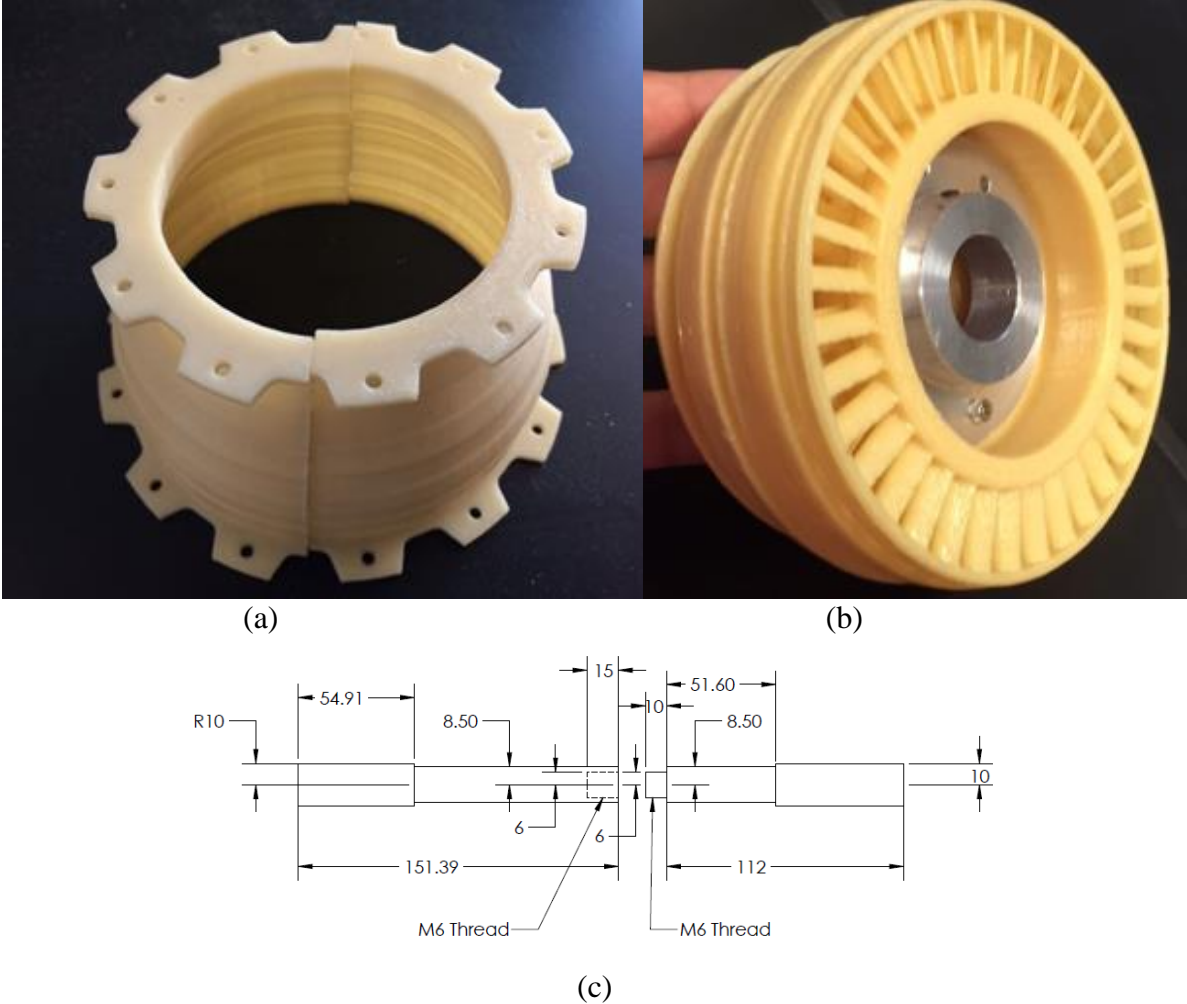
(a) Some parts had to be split in order to assemble them properly. (b) & (c) Some elements were redesigned and milled from aluminum in order to reduce lead time on manufacturing and to get better tolerances.
